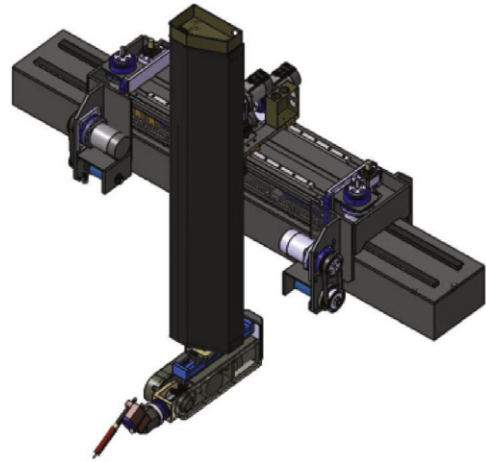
Rail Runner self-propelled shipbuilding welding robot.
